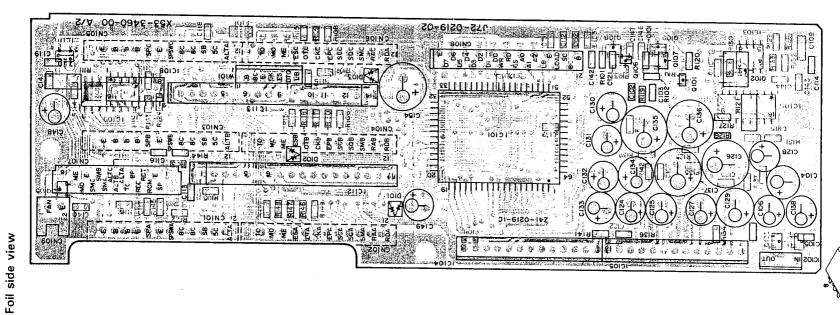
220 MHz band adjustment: Component layout (upper view)
